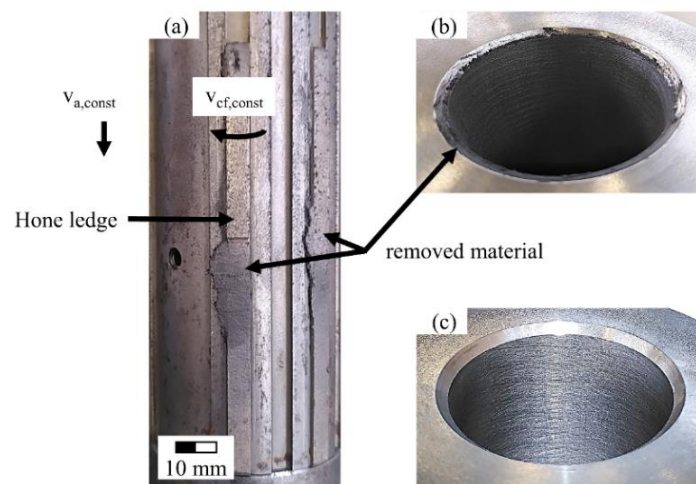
Honing tool and workpiece after the dry honing process; (a) honing tool with remnants of removed material; (b) workpiece with remnants of removed material; (c) cleaned workpiece
